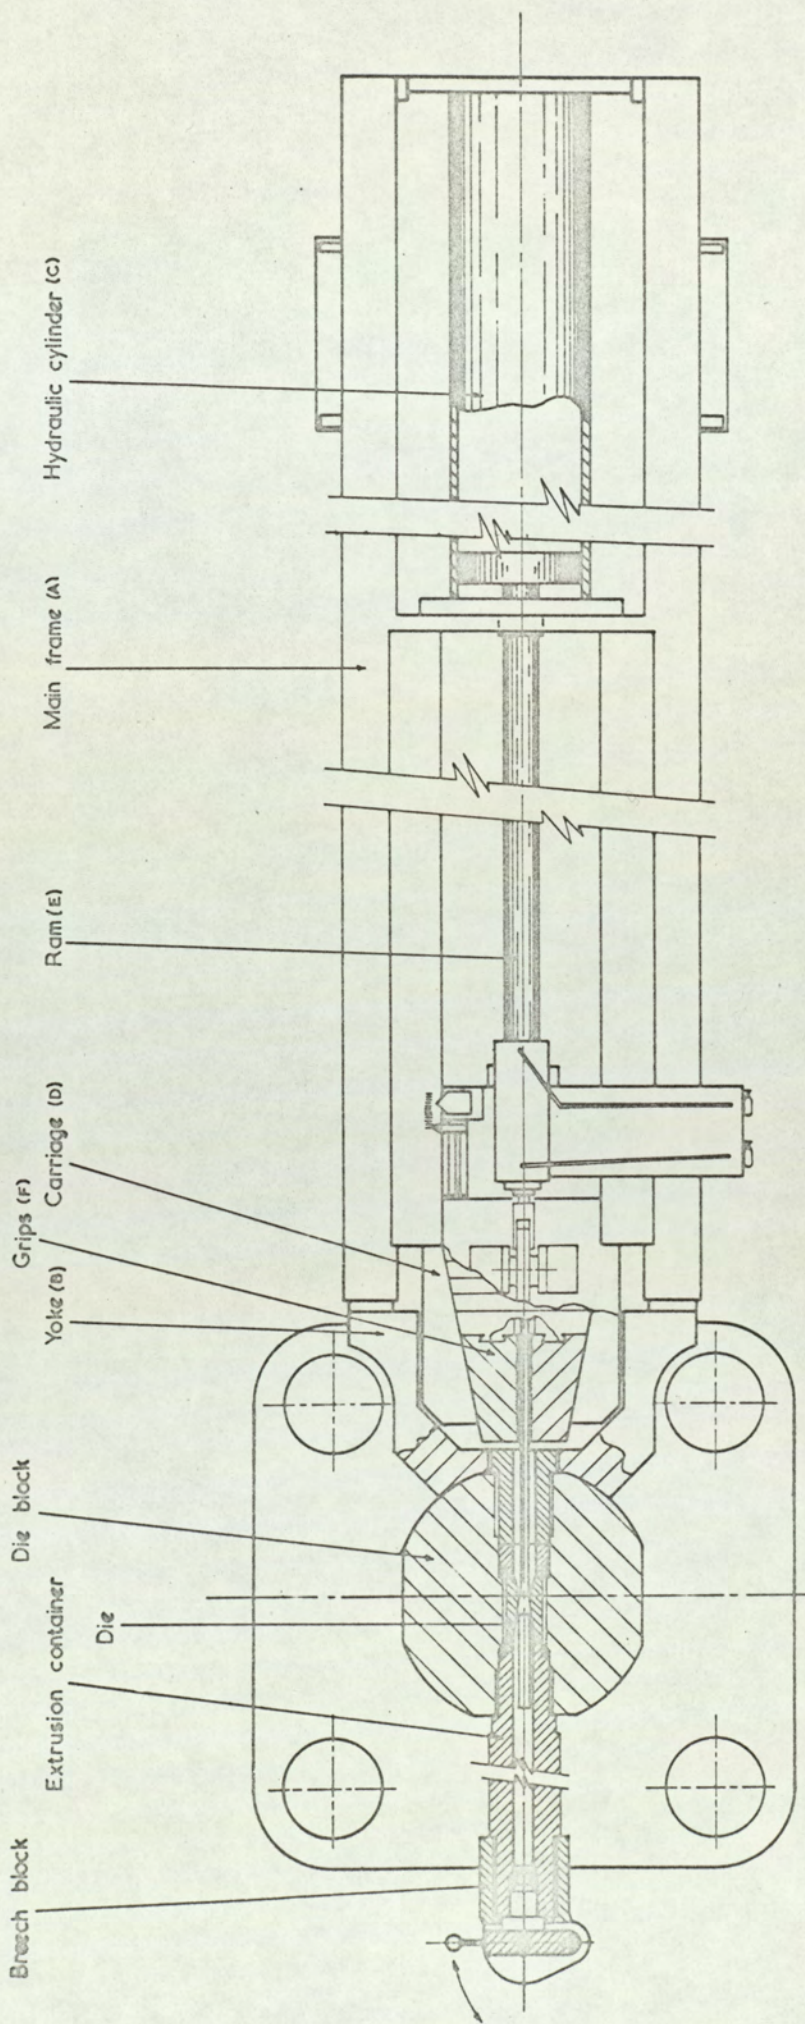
A HORIZONTAL SECTION PASSING THROUGH THE 200/50 HYDROSTAT AND THE DRAWING UNIT
